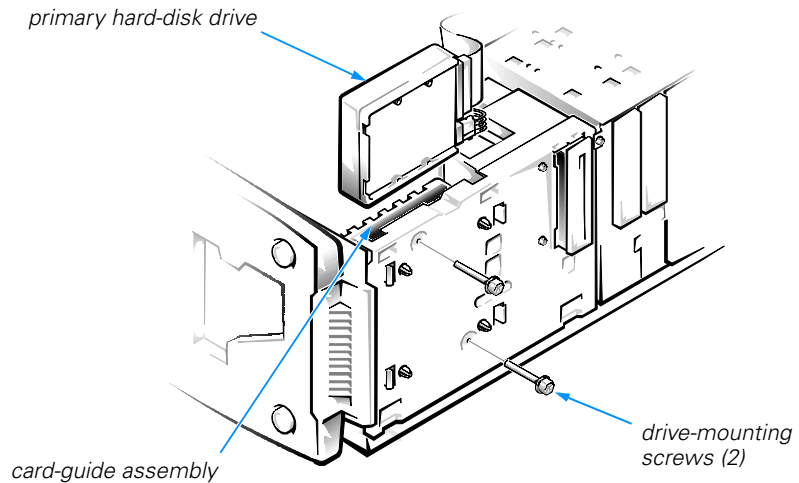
Installing a Drive in the Primary Hard-Disk Drive Bay
